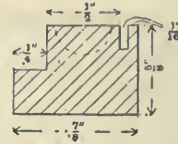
SECTION OF DARK-SLIDE FRAMING.
